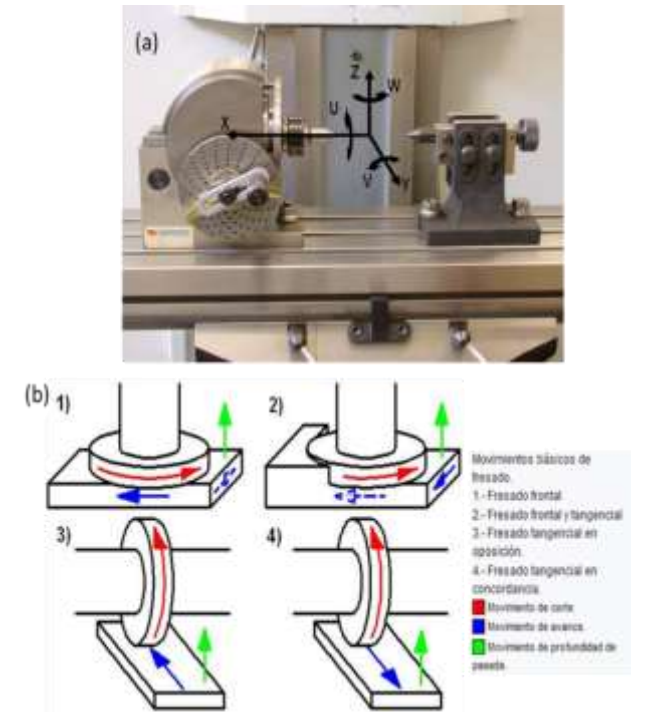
a) Milling cutter motion axis (b) Milling cutter basic motion [1,2]
